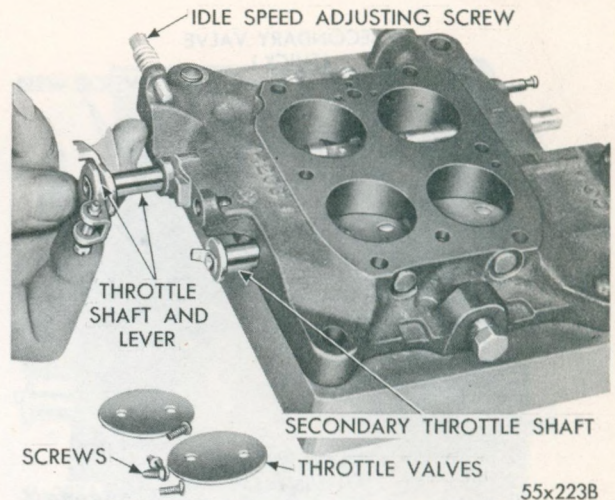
Removing or Installing Primary Throttle Shaft Lever
